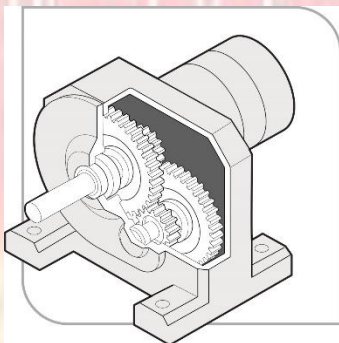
CUT-AWAY VIEW OF A FIXED PHYSICAL BARRIER ENCASING THE GEAR ASSEMBLY AND ELECTRIC MOTOR
